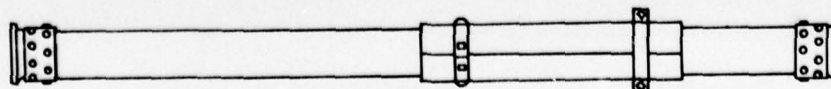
TAIL ROTOR DRIVE SHAFT REPAIR
